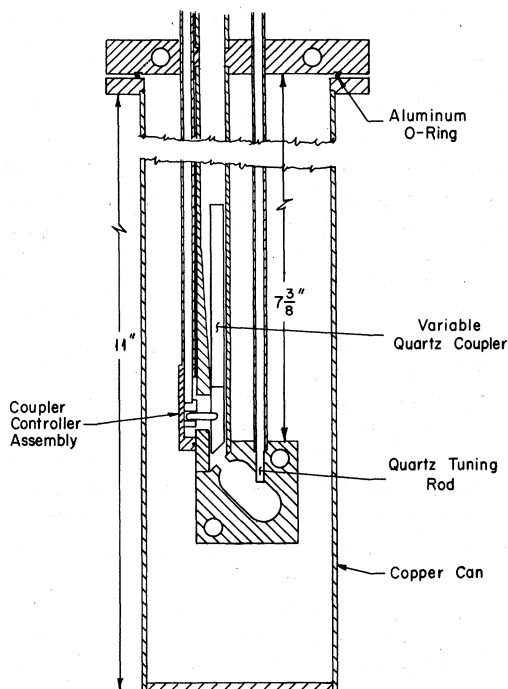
Cross section of cavity structure showing details of cavity tuning and coupling devices. Sample retaining plates not shown.
